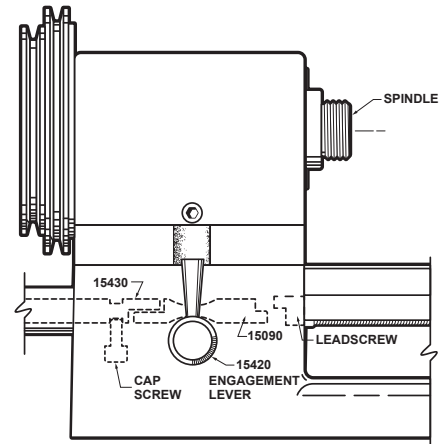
Leadscrew engagement shafts in place inside the leadscrew support tube.
